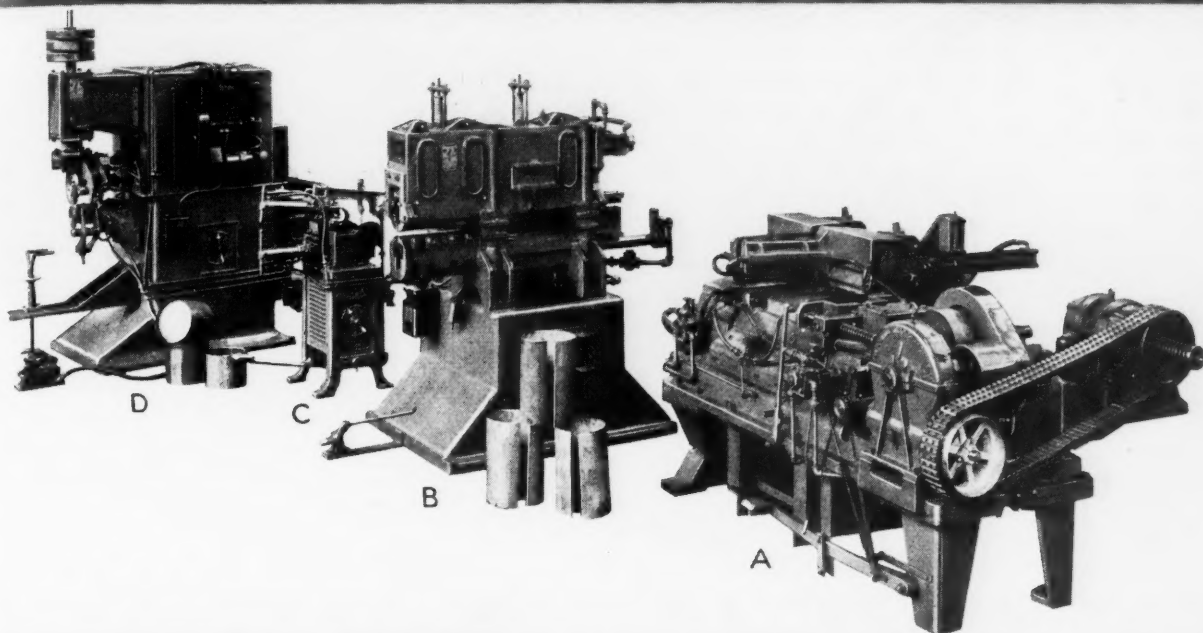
Battery of Federal Machine & Welder Co.'s Machines Used in the Production of Metal Pails and Containers
